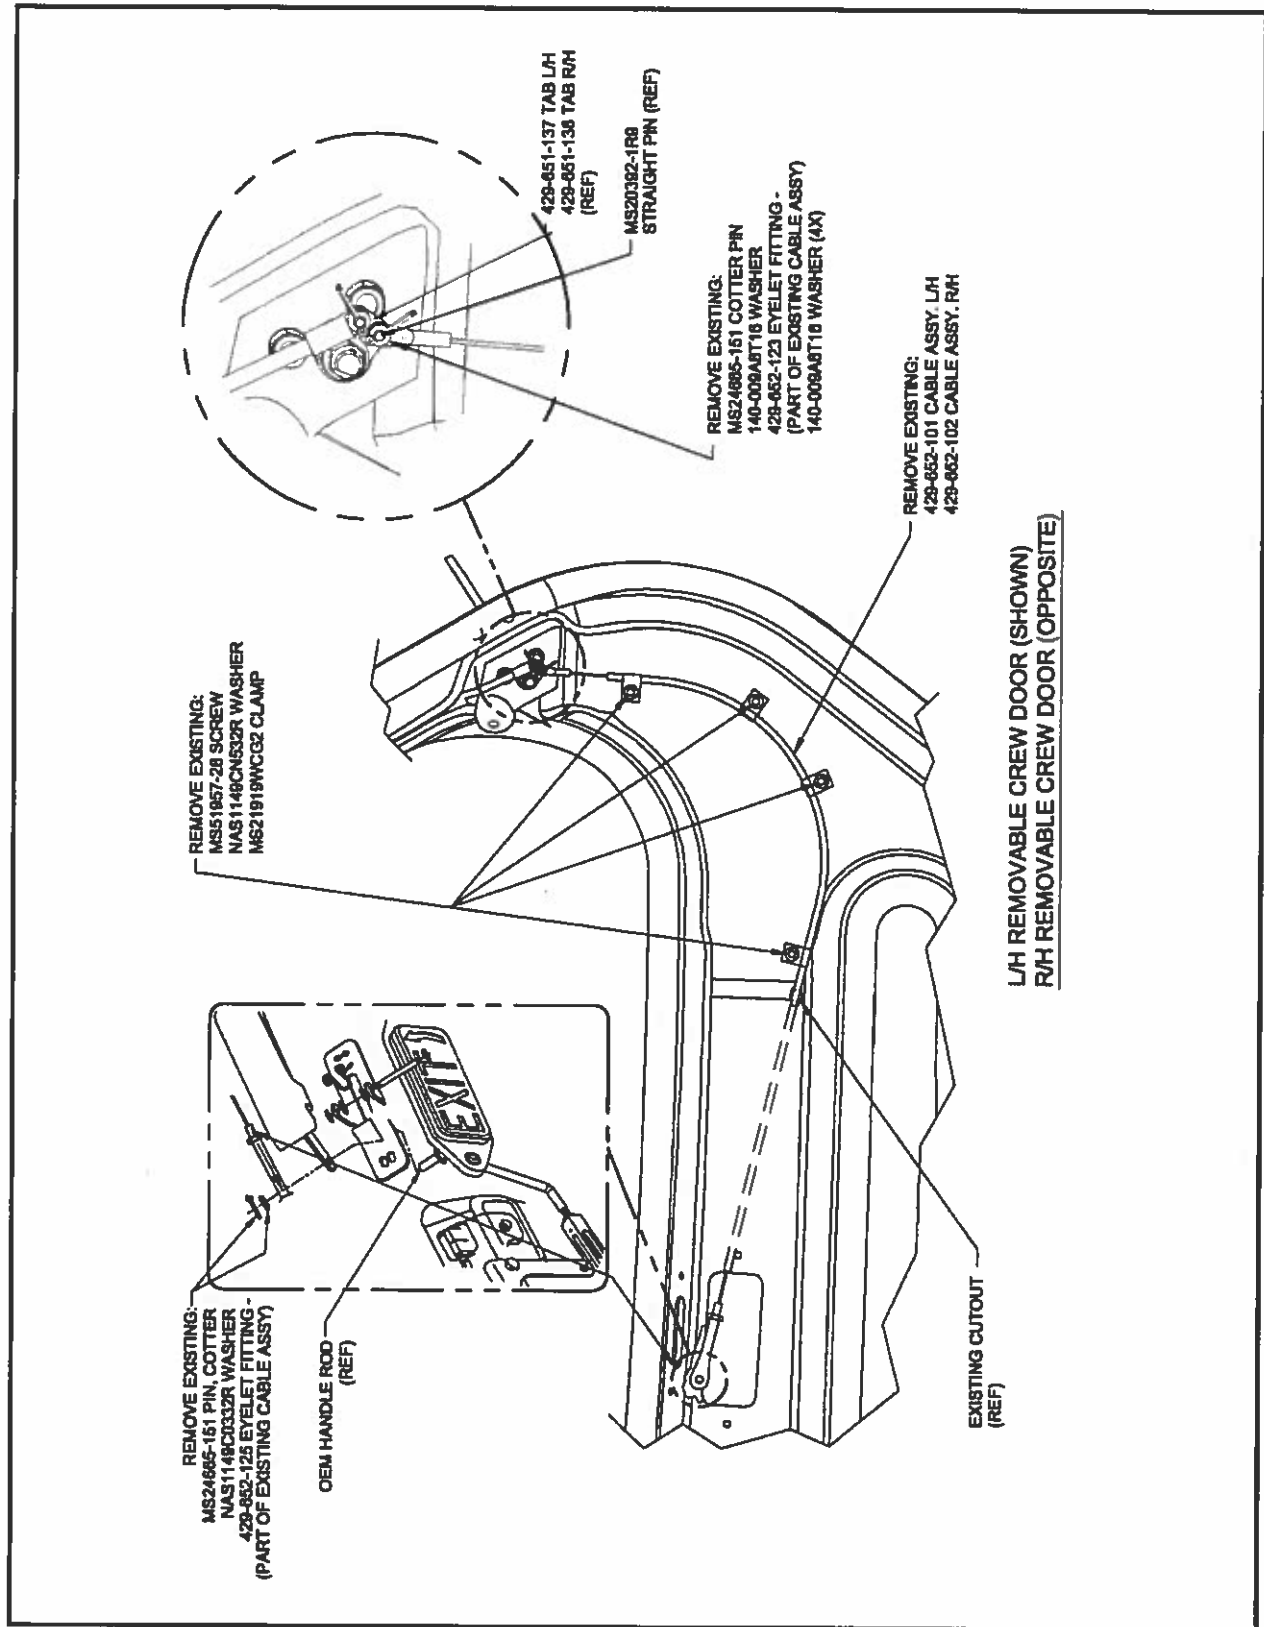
CABLE ASSEMBLY REMOVAL
